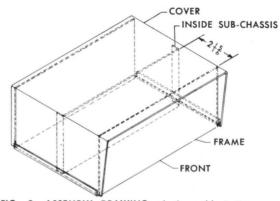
ASSEMBLY DRAWING of the cabinet top and bottom, showing the position of the center chassis in the cabinet. The cabinet and chassis are fastened together with self-tapping screws.
